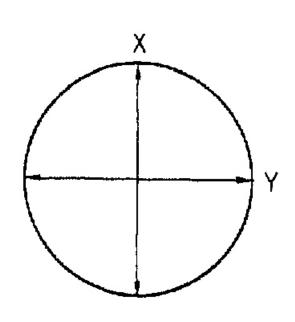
Measuring Crankshaft Journal Diameter Courtesy of MAZDA MOTORS CORP.
